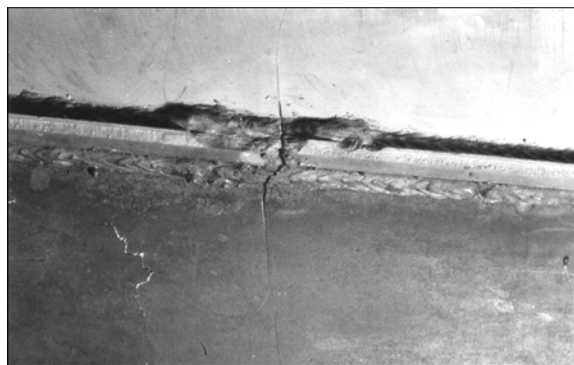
Type of damage of butt bimetal weld at fatigue tests of large-sized steel-aluminium structure
